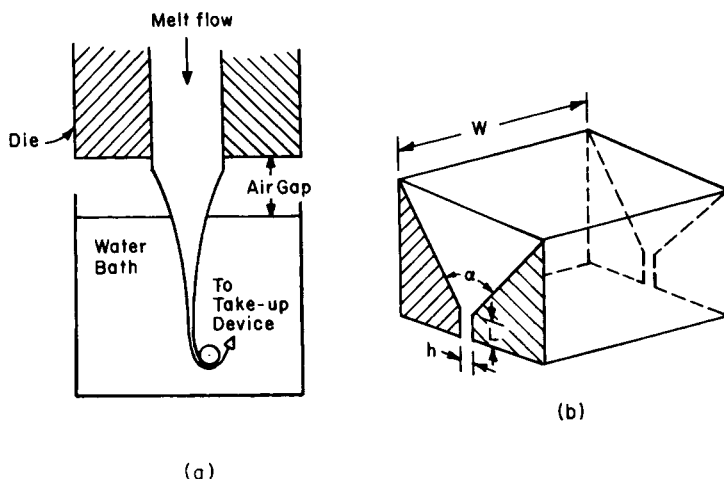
Schematic of the film extrusion apparatus: (a) film line; (b) die geometry.
